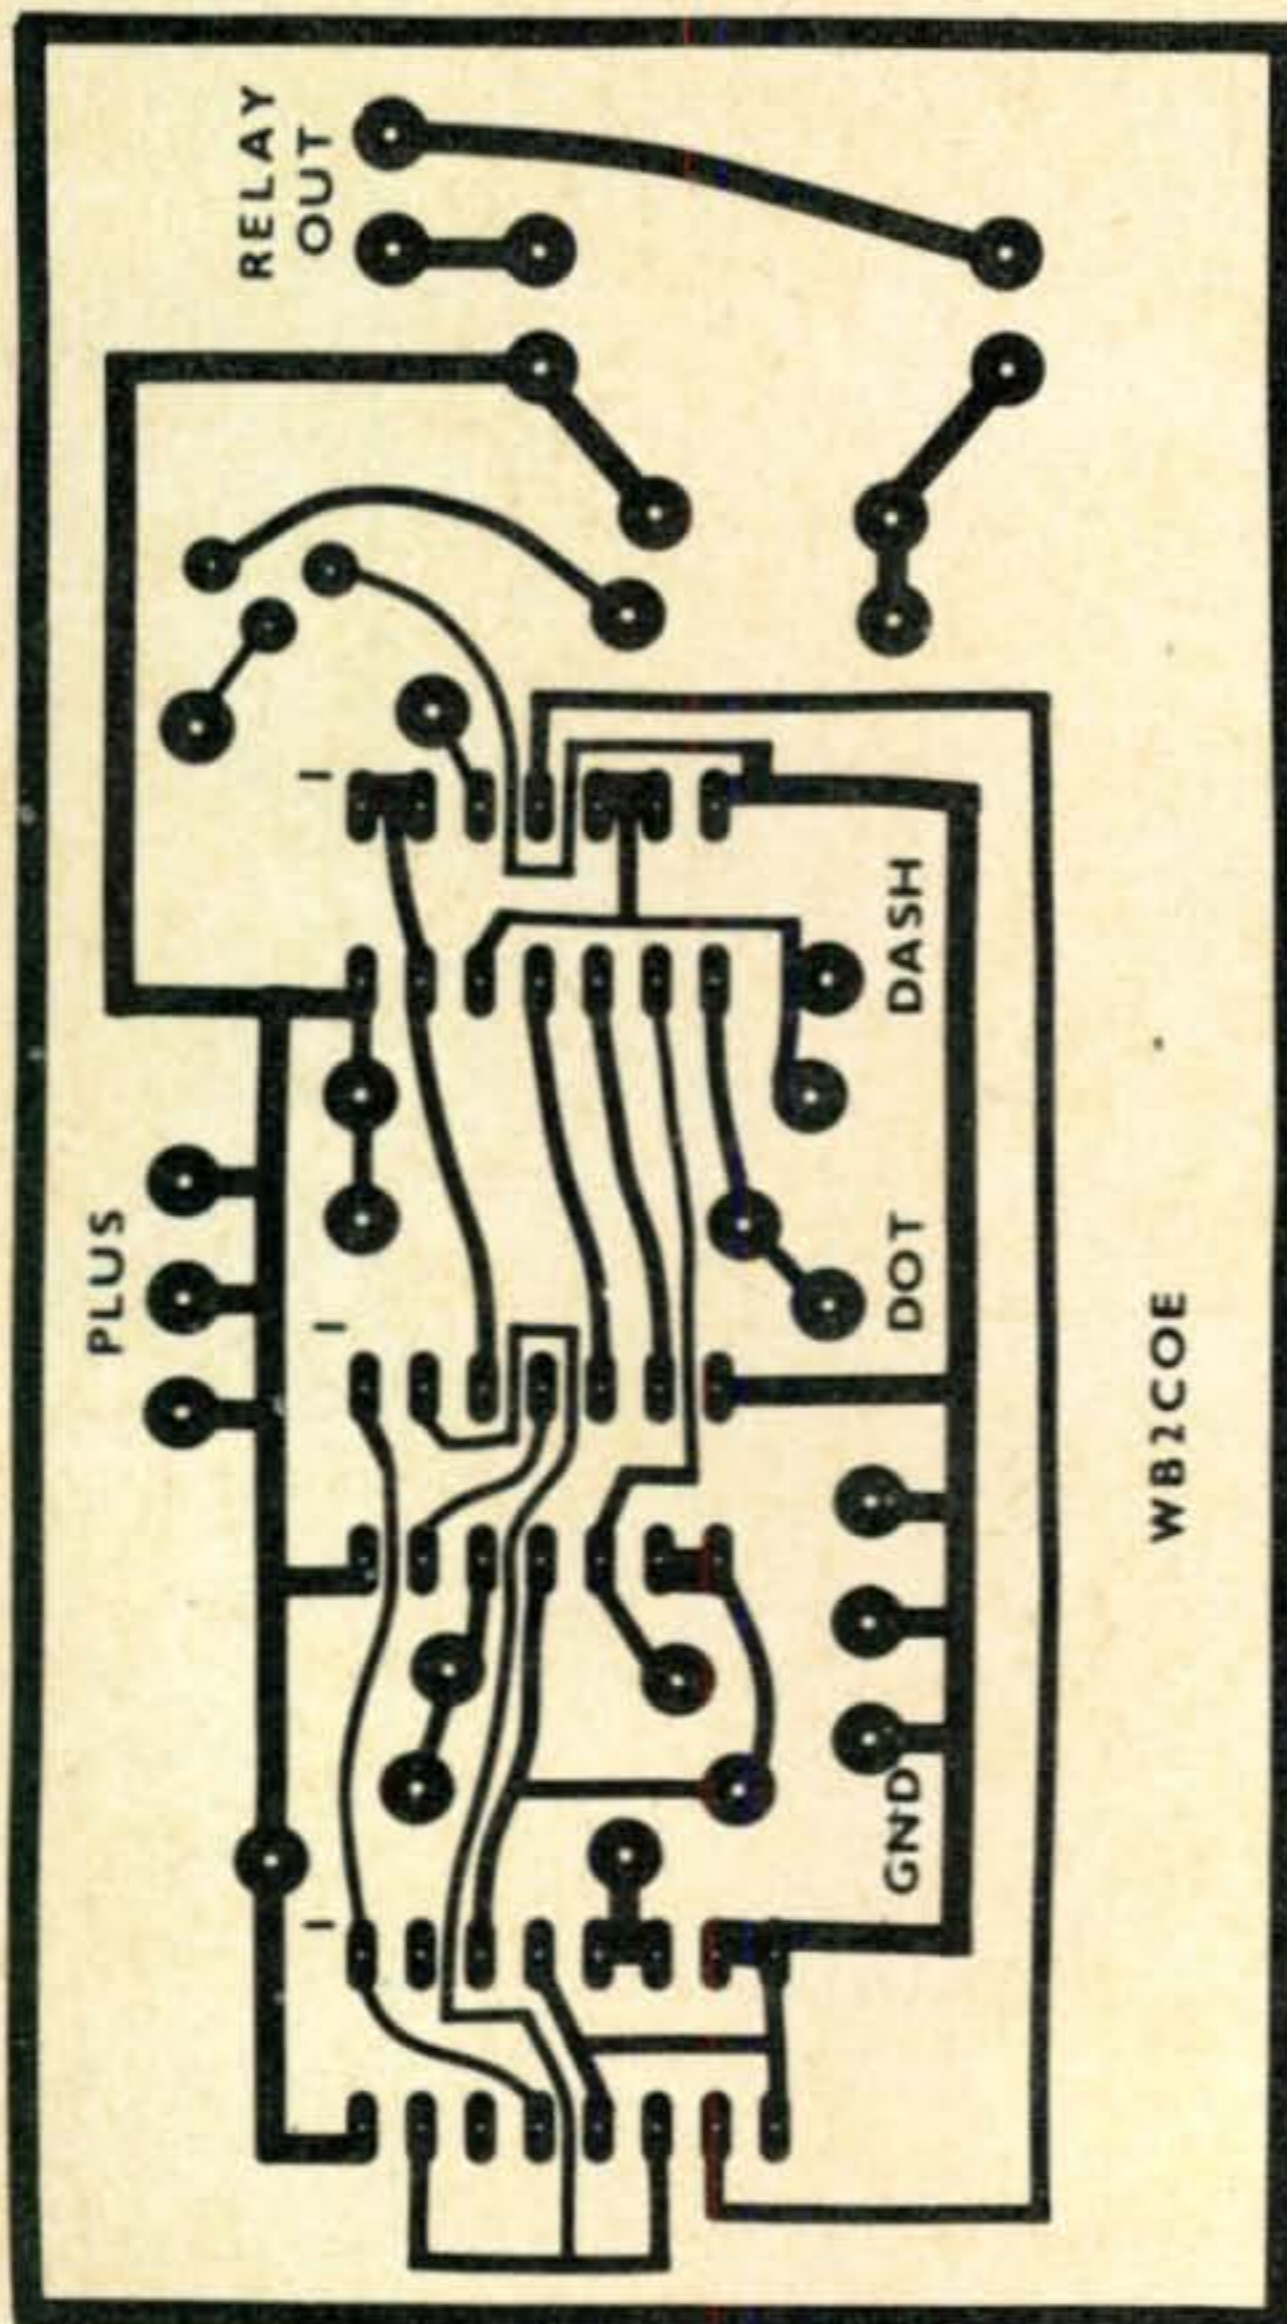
A—Full-size P-C board foil layout for the Version I COSMOS keyer.
